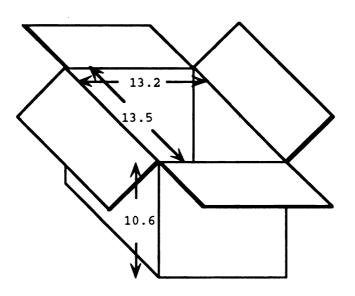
The inside dimensions of the instrumented RSC (All dimensions in inches).
